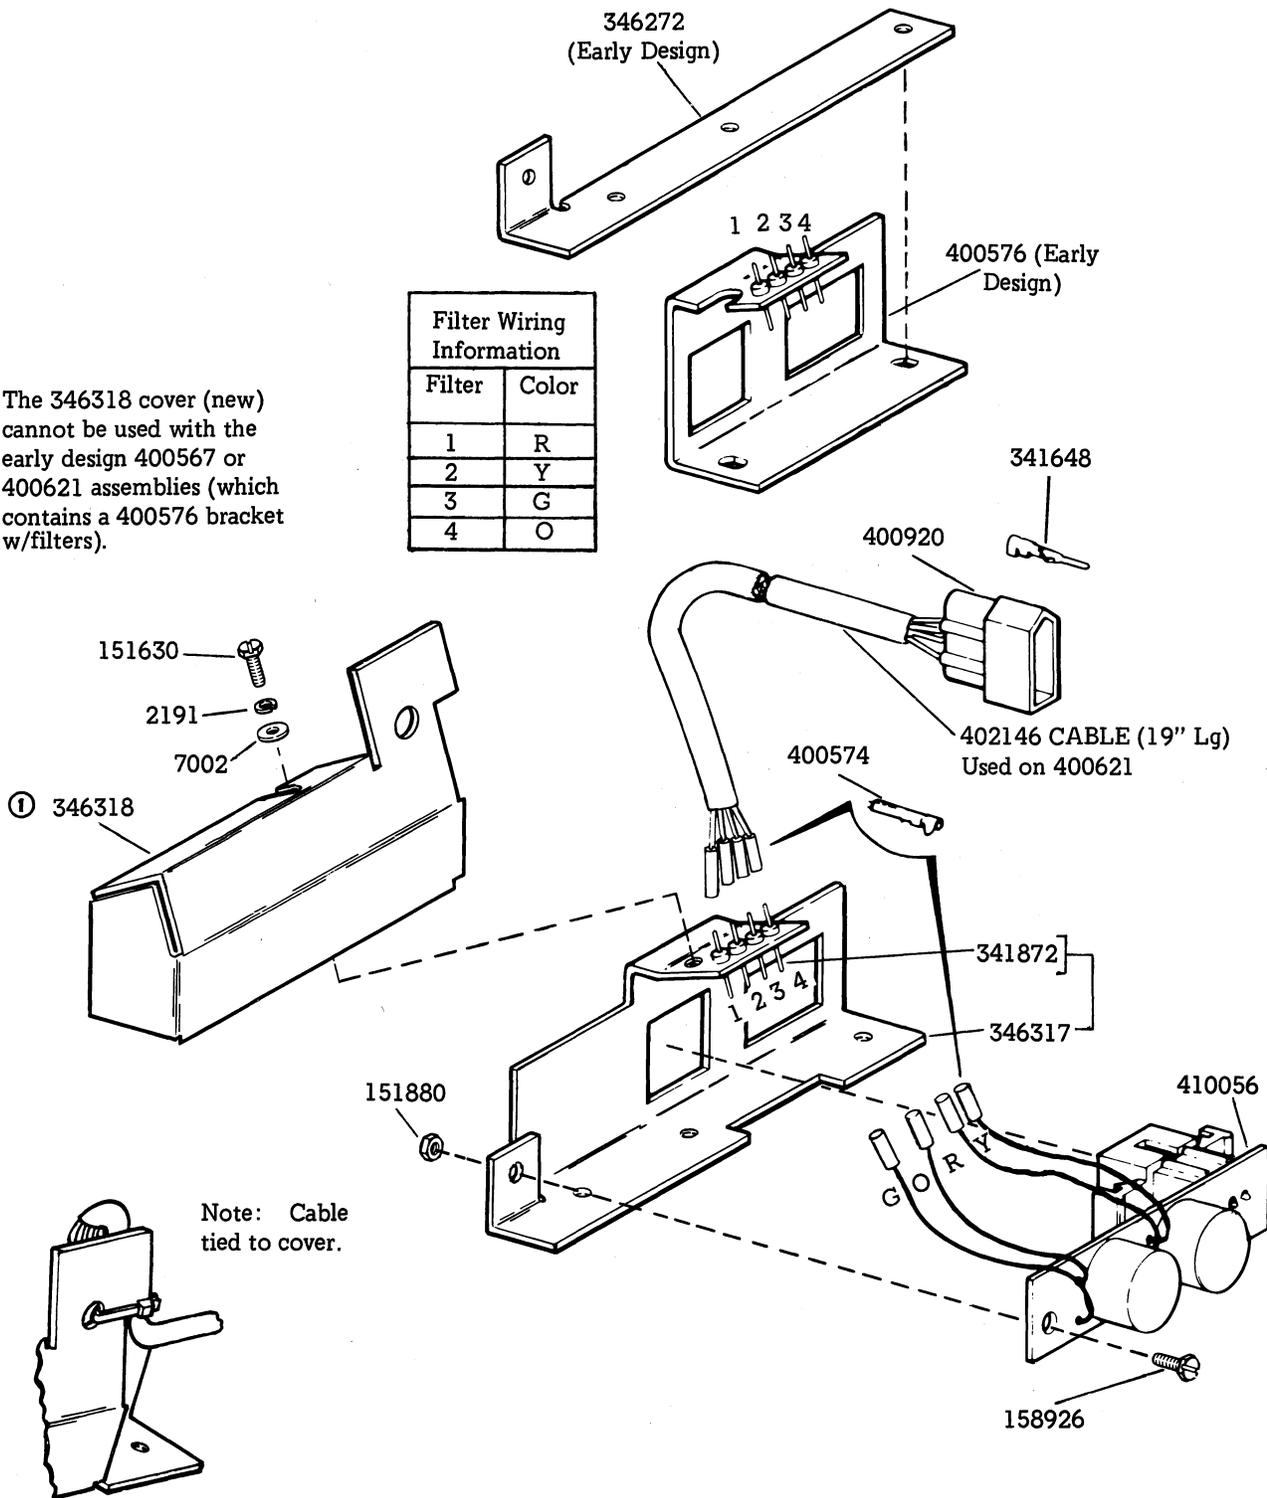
400621 SSI Cable Assembly for Friction Feed Printer Under Monitor Cabinet
